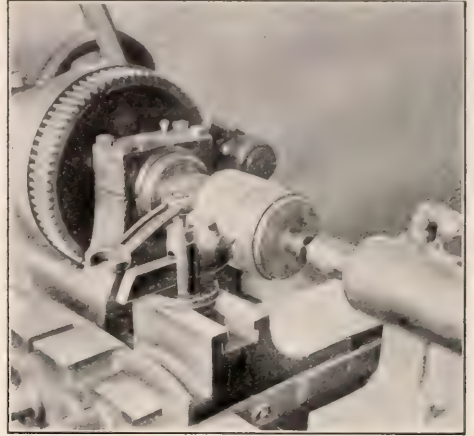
Lathe "turning off" the rough exterior of piston and bringing it to exact size and form.
